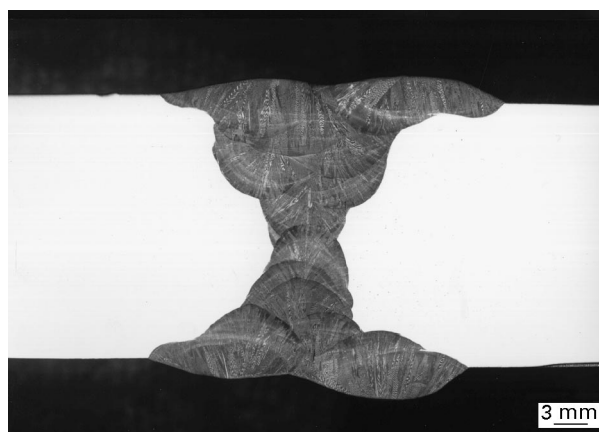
Macrograph of submerged arc welding of plates from steel X2 CrNiN 18 10, with filler metal X2 CrNiMnMoN 20 16.
